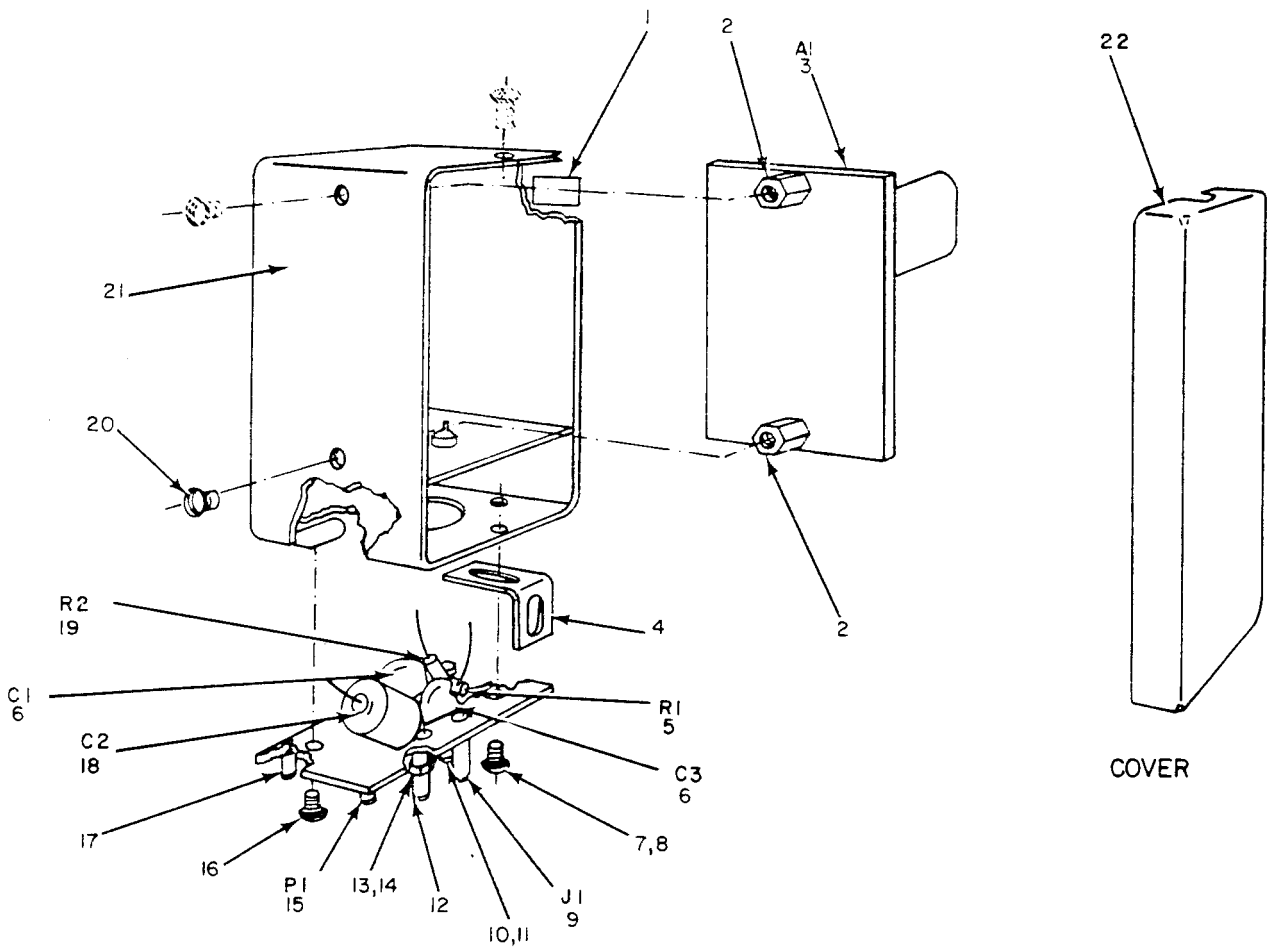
Circuit Board Assembly (A2A1) (Sheet 1 of 2).
